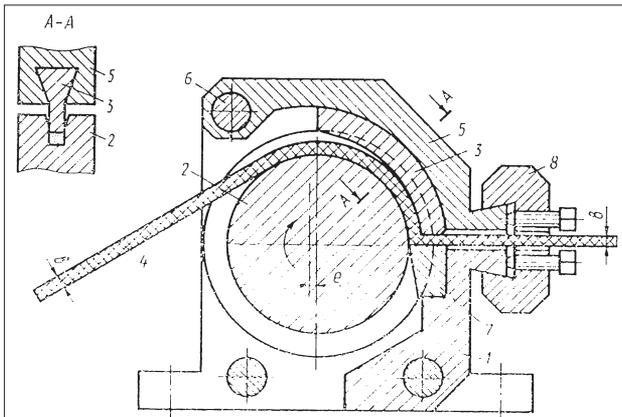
Setup for continuous ECAP of long billets [8,9]: 1- case; 2- square pass drive roll; 3- ring sector insert; 4- semifinished product; 5- jaw; 6- axis of rotation; 7- stopper; 8- wedge clamp
